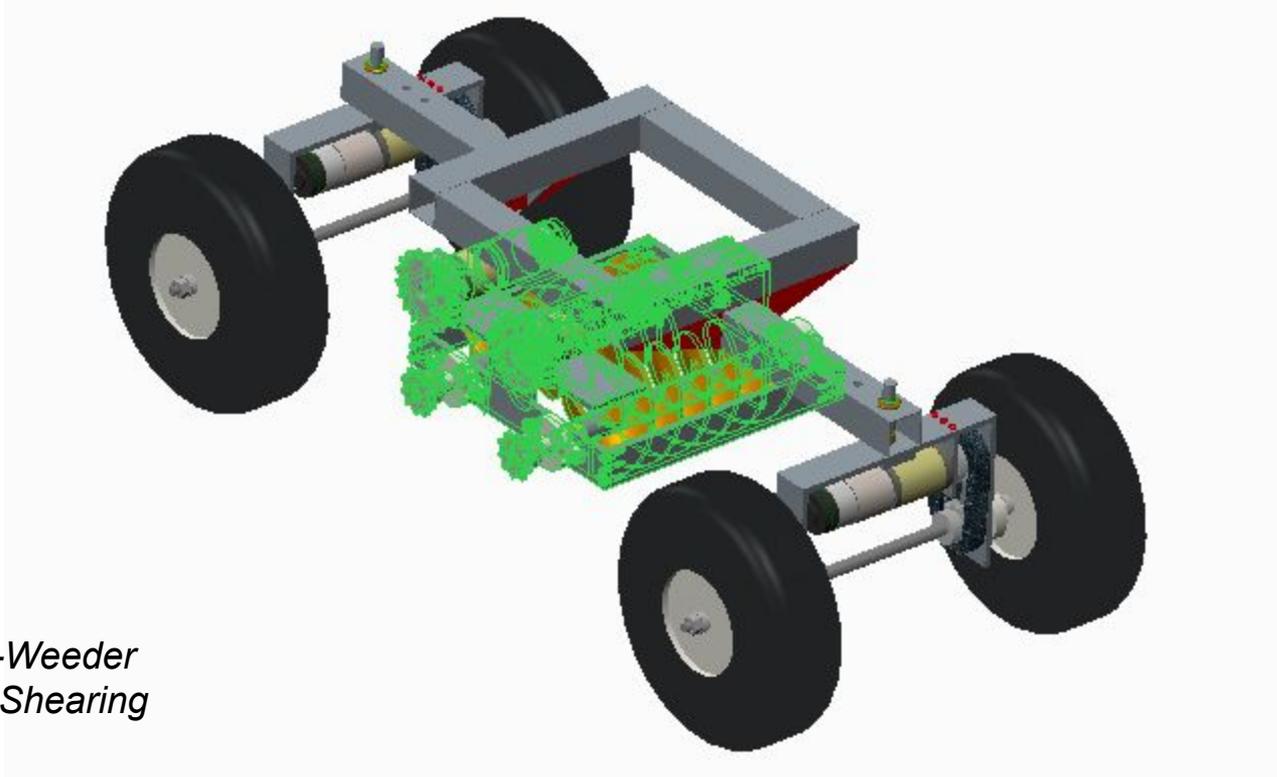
Robo-Weeder with Highlighted Shearing Mechanism.
